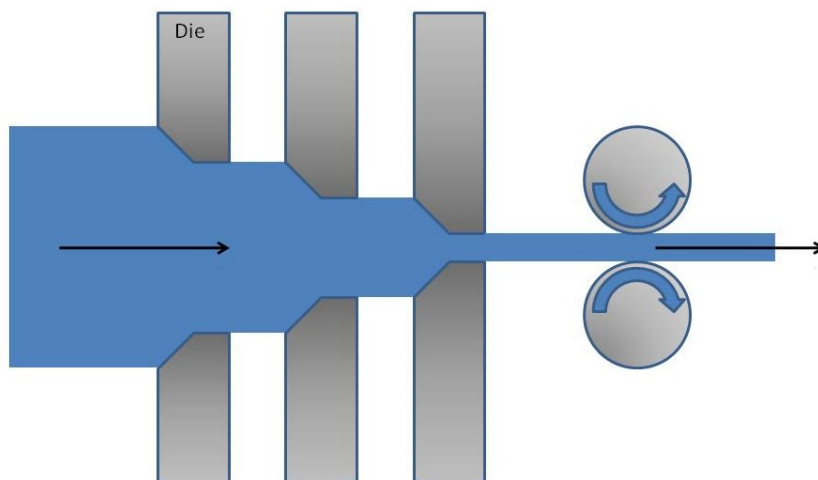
Principal sketch of wire drawing. A billet is pulled through several dies to produce wire. Figure from [3].
